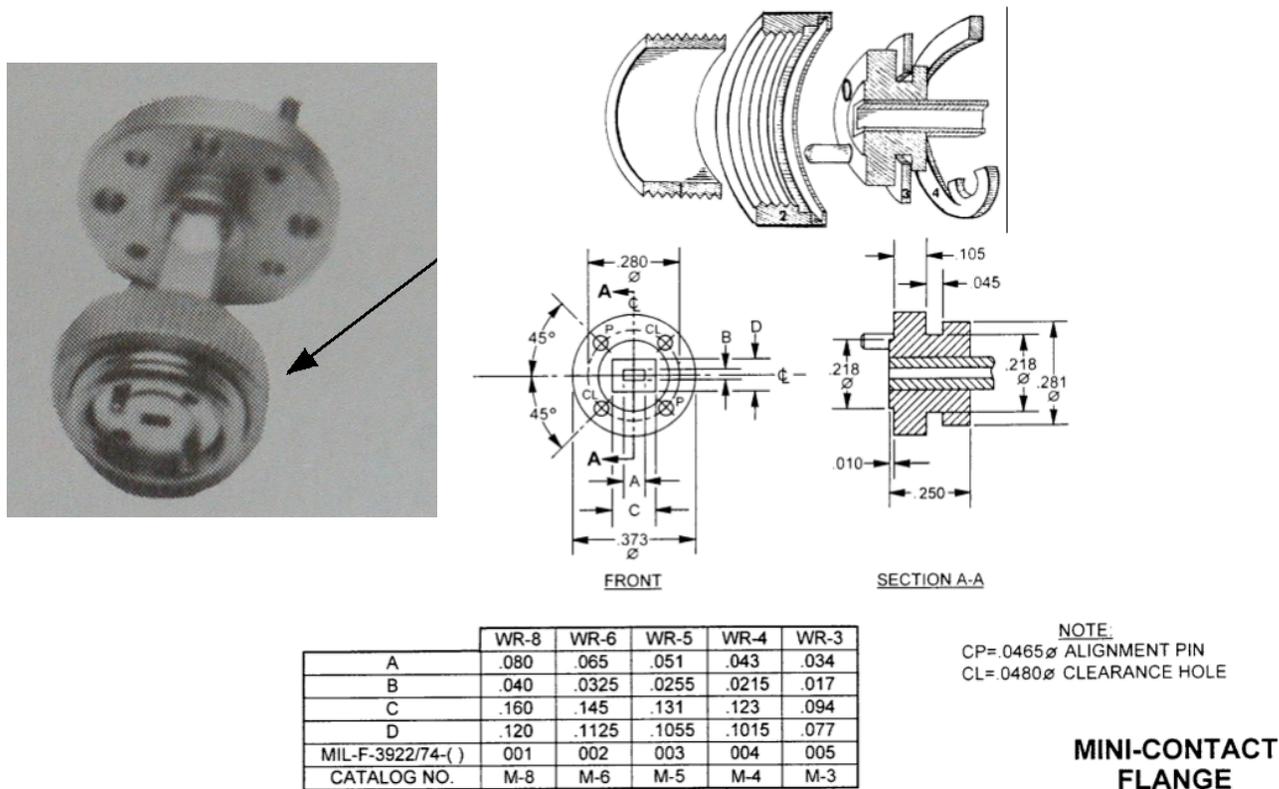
The MIL Spec mini-contact flange (TRG-714 type) (from the Custom Microwave catalog). Dimensions in inches.
